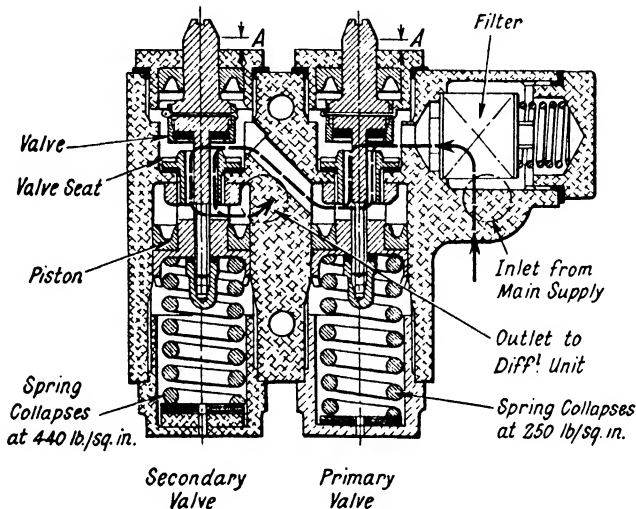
WHEN PARALLEL PORTION OF PRIMARY VALVE SPINDLE DISAPPEARS VALVE IS CLOSED. IF THIS HAPPENS TO SECONDARY VALVE SPINDLE IT INDICATES THAT PRIMARY VALVE NEEDS ATTENTION
